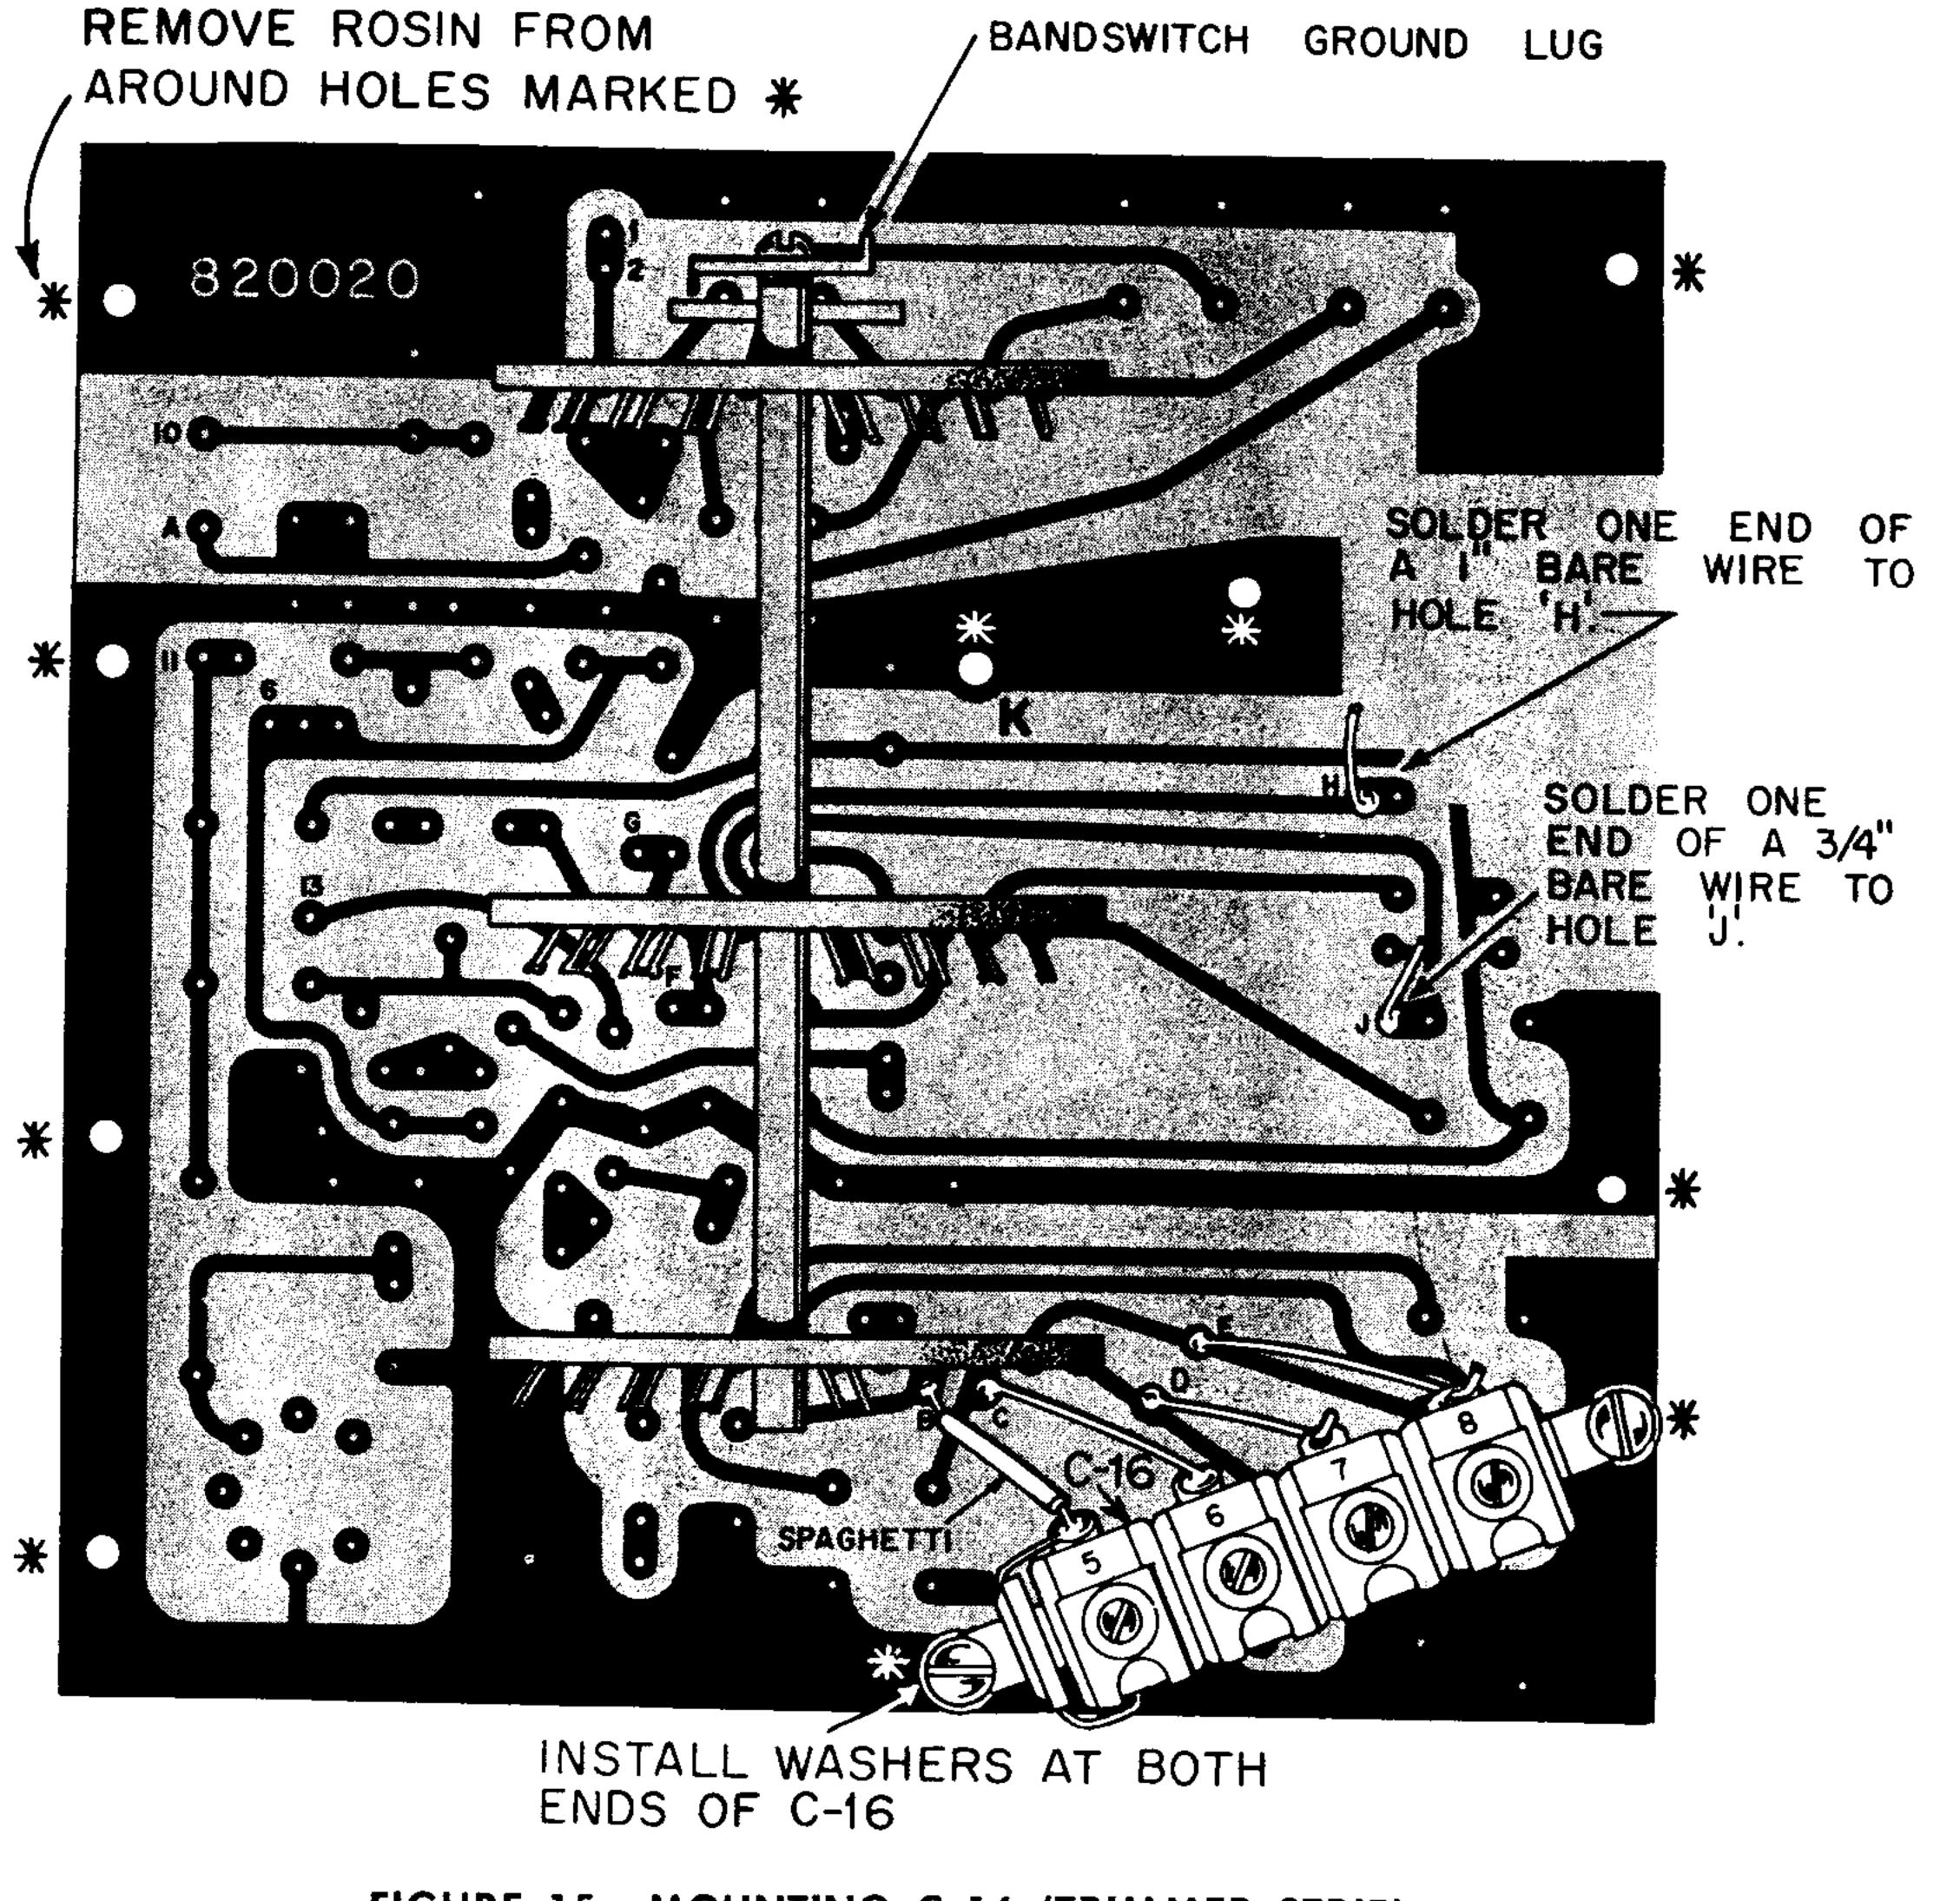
MOUNTING C-16 (TRIMMER STRIP)
